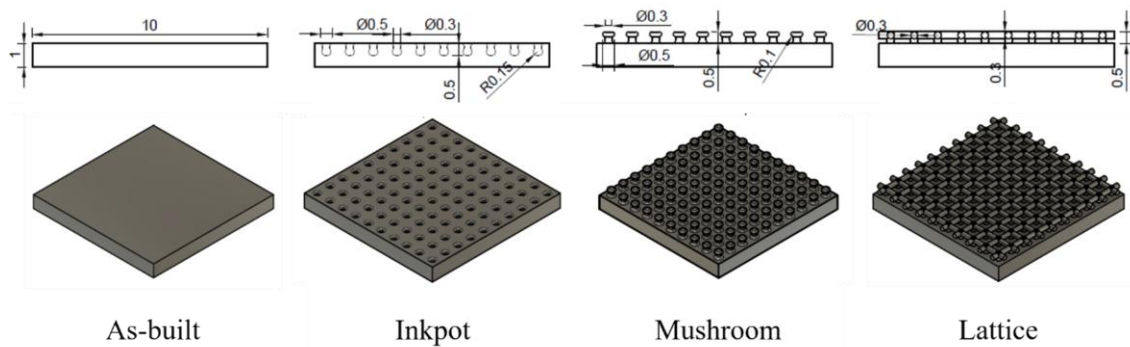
Schematic drawings of the submillimetric structures on the surface of the AlSi10Mg substrates. Dimensions in millimeters.
